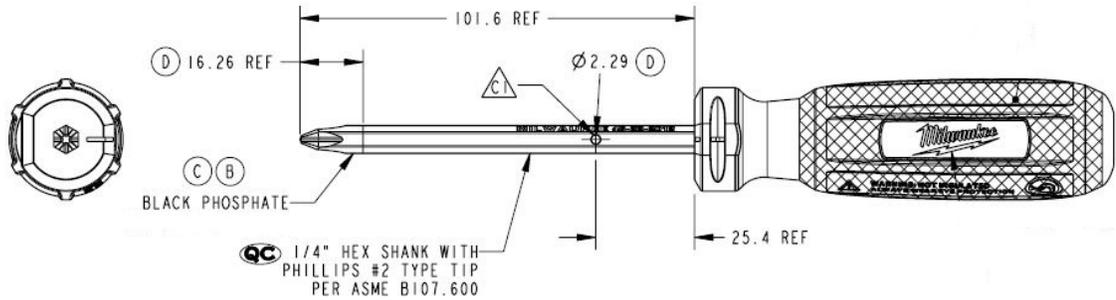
Engineering Drawing of Phillips Screwdriver
